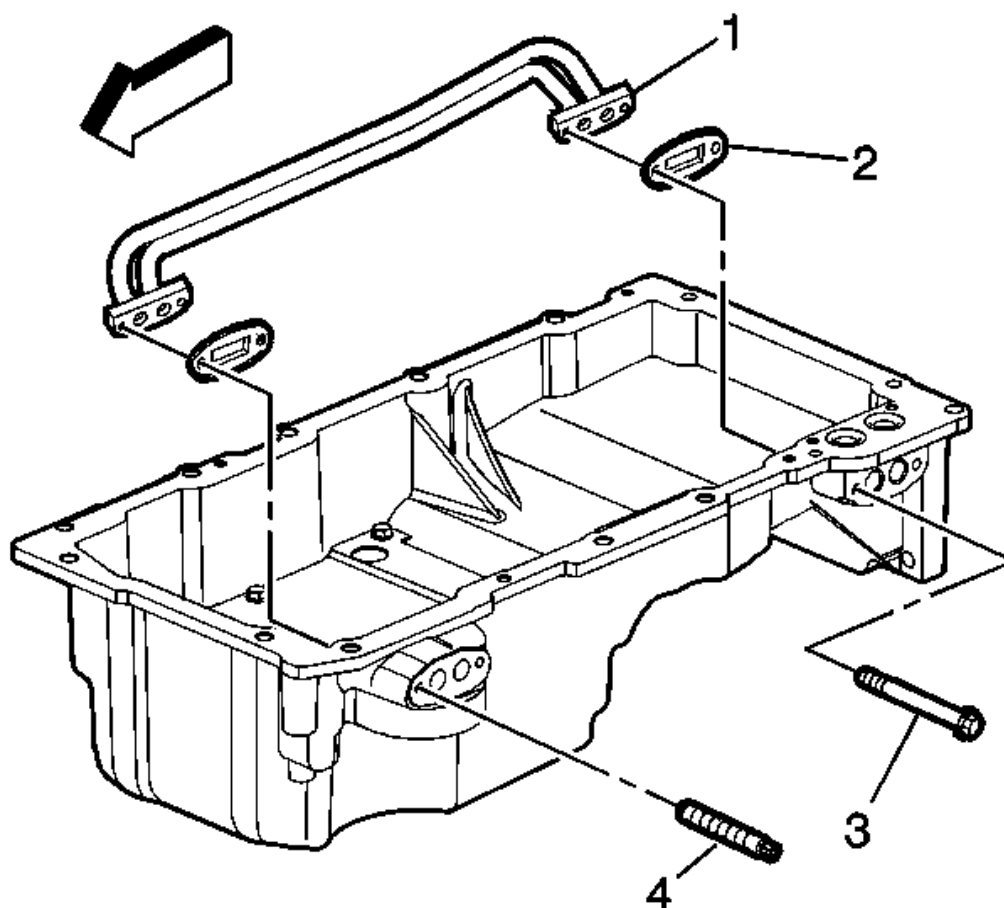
View Of Oil Transfer Tube, Gaskets, Bolts & Studs
